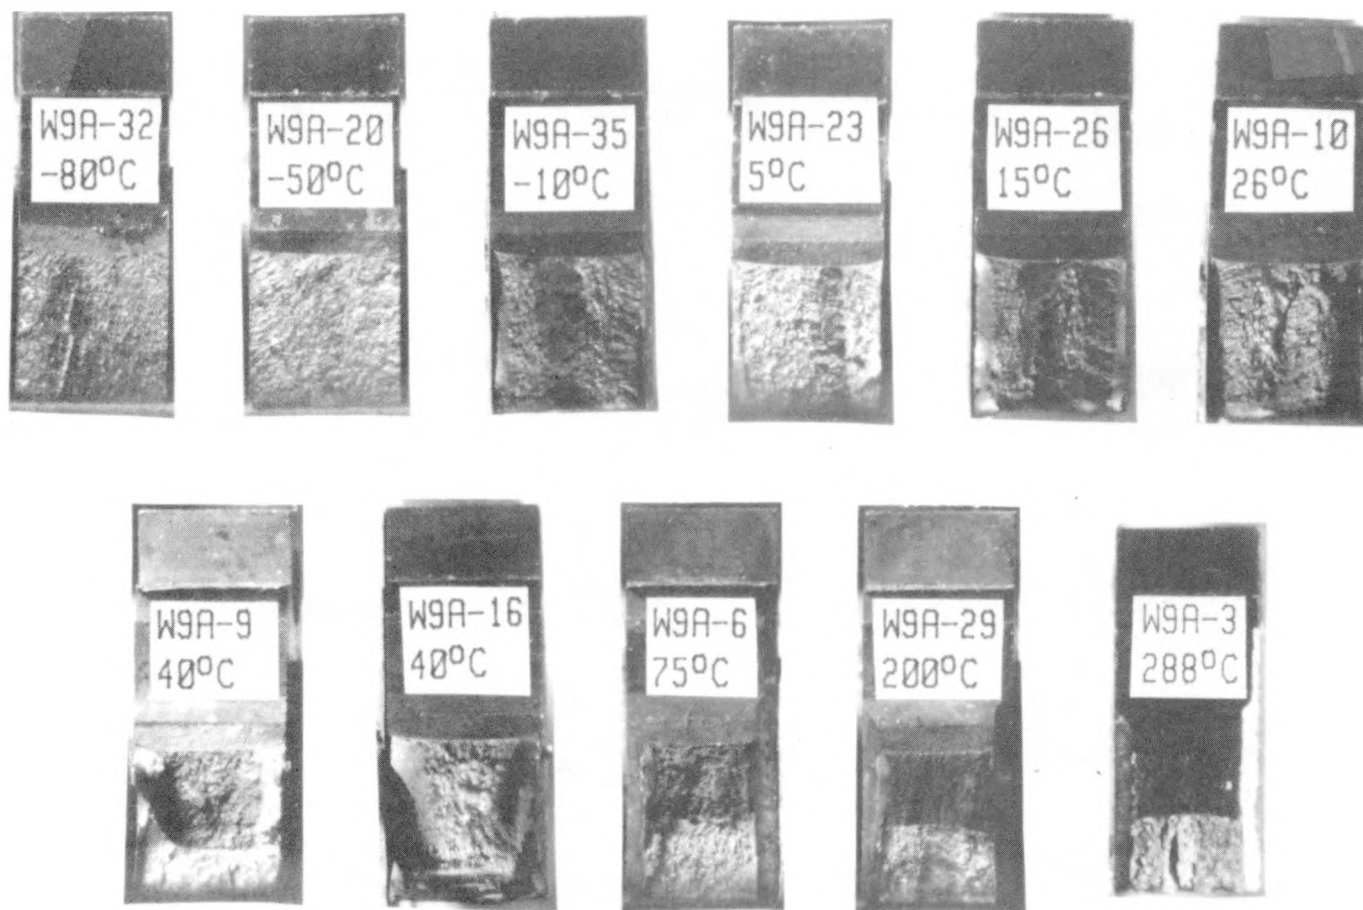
Fracture surfaces for the Linde 0091 weld (W9A), in the IAR condition to a fluence of $2.2 \times 10^{19} \text{ n/cm}^2$.
